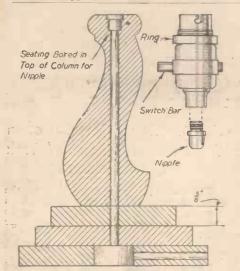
Sectional view of base and column, and detail of lamp fitting used.
